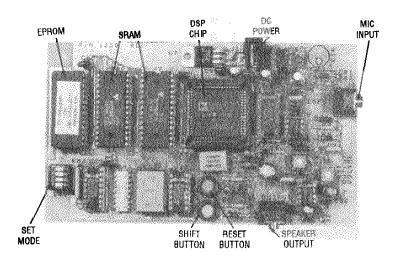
THE VFX PROTOTYPE. Carefully check the board for solder splashes and bridging before applying power.
